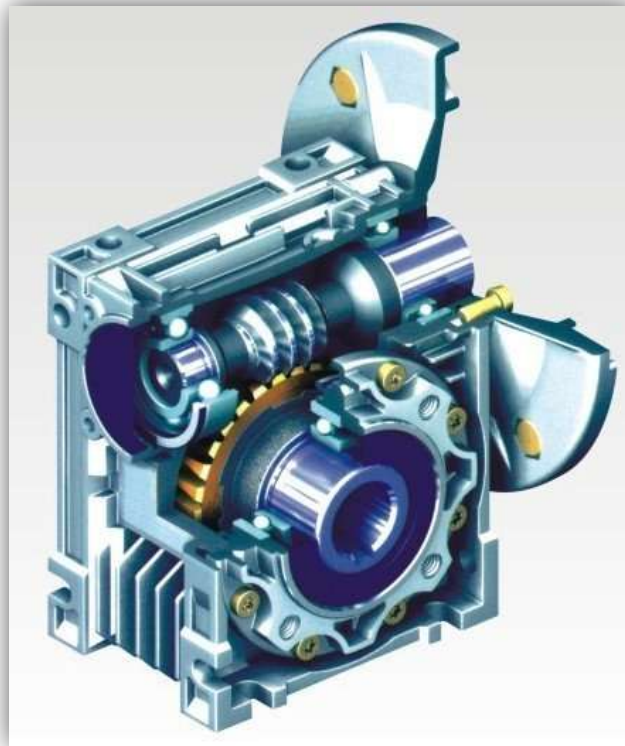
Cutaway of a Worm Gearbox Showing Gear and Bearing Arrangement [31]
